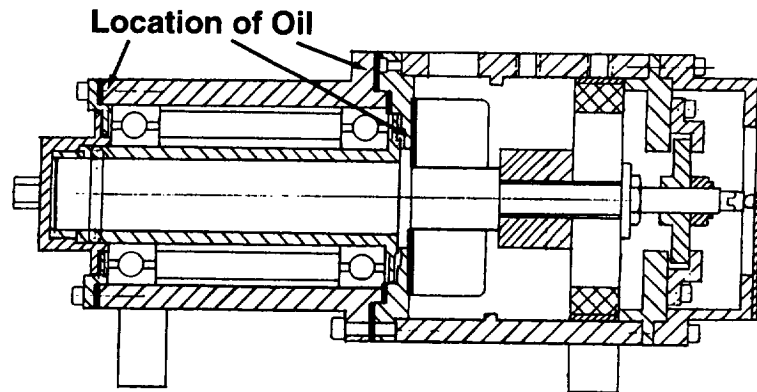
Bearing Assembly Test Fixture (1/2 scale)
